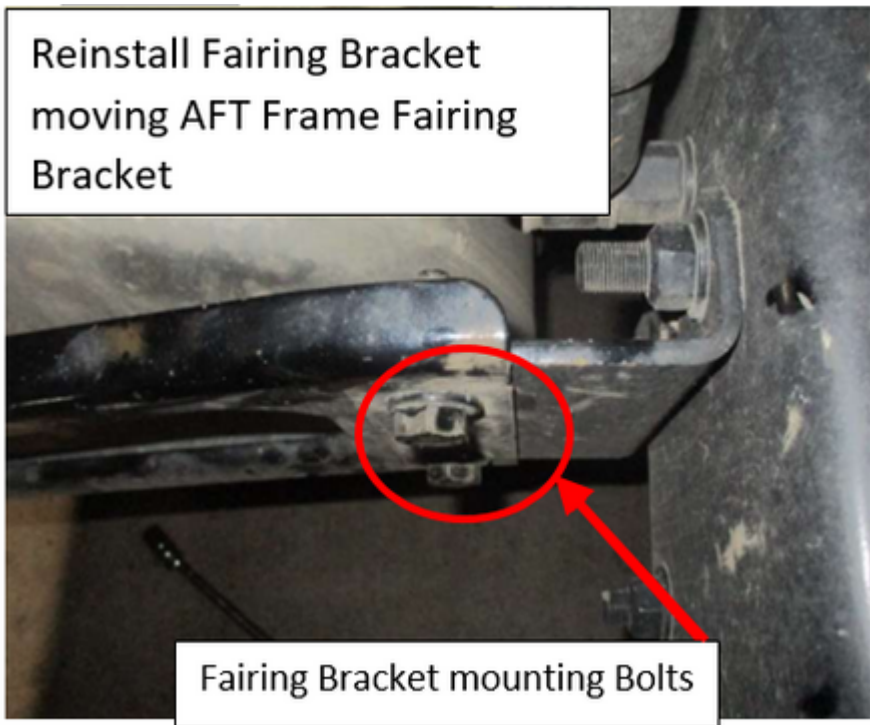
Fairing Bracket moved AFT the Fairing Frame Bracket.
